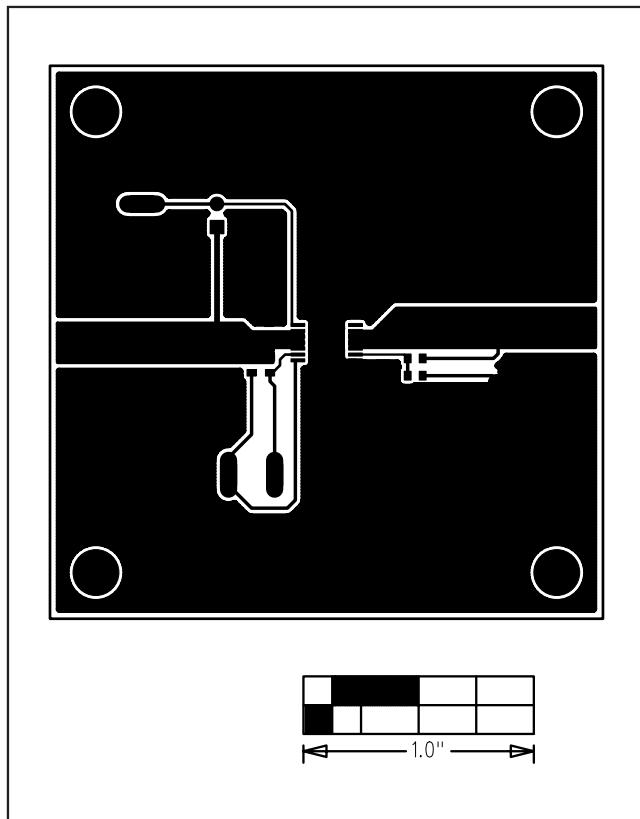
MAX8526 EV Kit PCB Layout—Component Side
